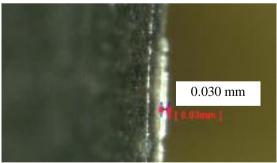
Smallest Burry dimension at material 1.2 mm
